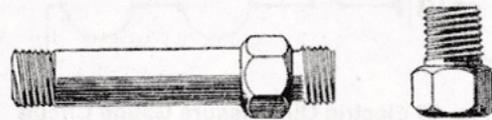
Connector and Plug for Making Hydrostatic Fuel Gauge Tests
